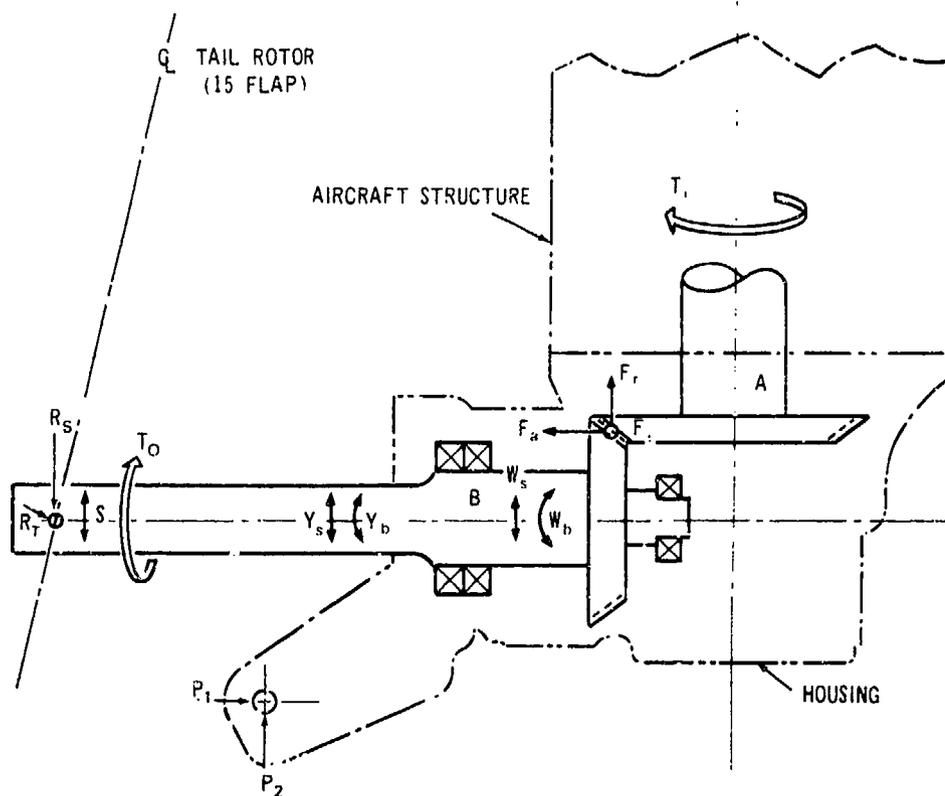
Typical Tail Rotor Gearbox Load Diagram
